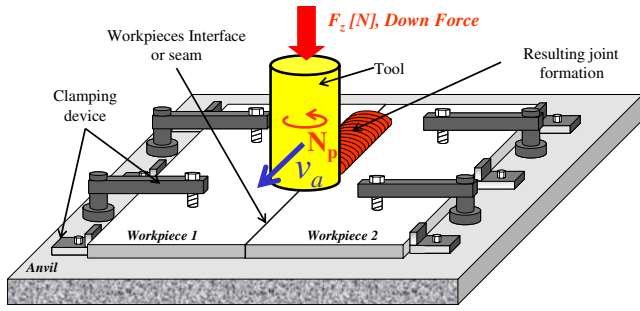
Schematic drawing of friction stir welding of two plates
